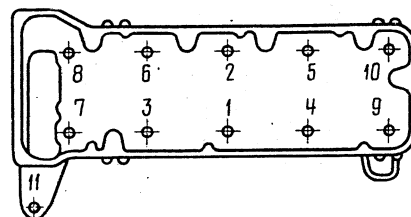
Cylinder Head Bolt Tightening Sequence
